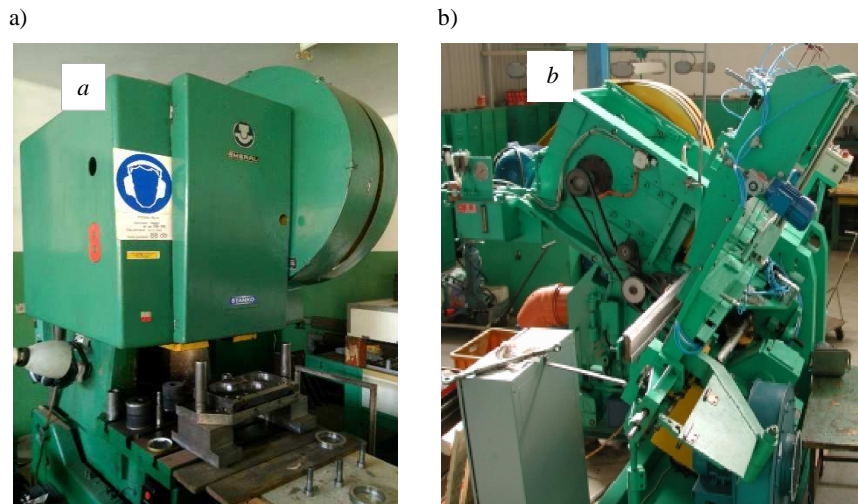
Eccentric presses: a) LEN 40C, b) CEVOLANI 40B
